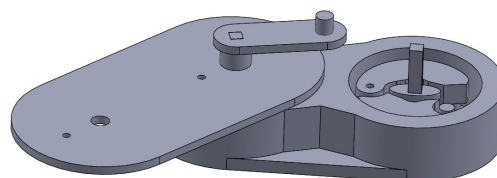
Isometric view of new chain design, incorporating bi-stable drum brakes
